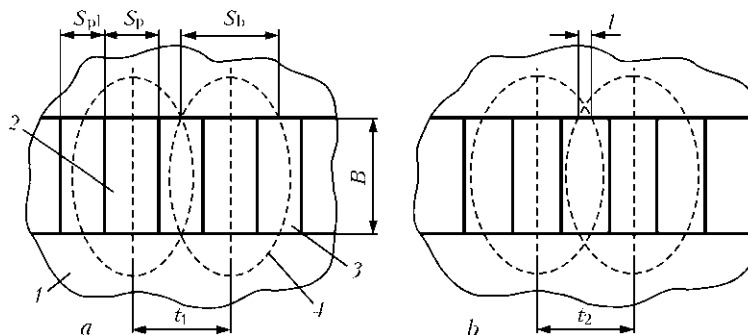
Scheme of groove and expected penetration shape in MESW with consumable nozzle: $a - l = 0$; $b - l > 0$; 1 – body of workpiece subject to repair; 2 – filled-in hole; 3 – shaping spacer plate; 4 – isotherm of melting; t_1 and t_2 – distances between axes of filled-in holes (pitch)
